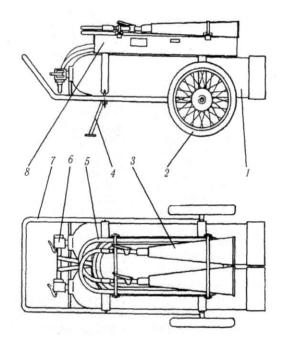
Mobile BB-80 extinguisher: 1- balloon; 2 - wheel; 3 - bell; 4 - support; 5 - hose; 6 - locking mechanism: 7 - frame; 8 - casing
